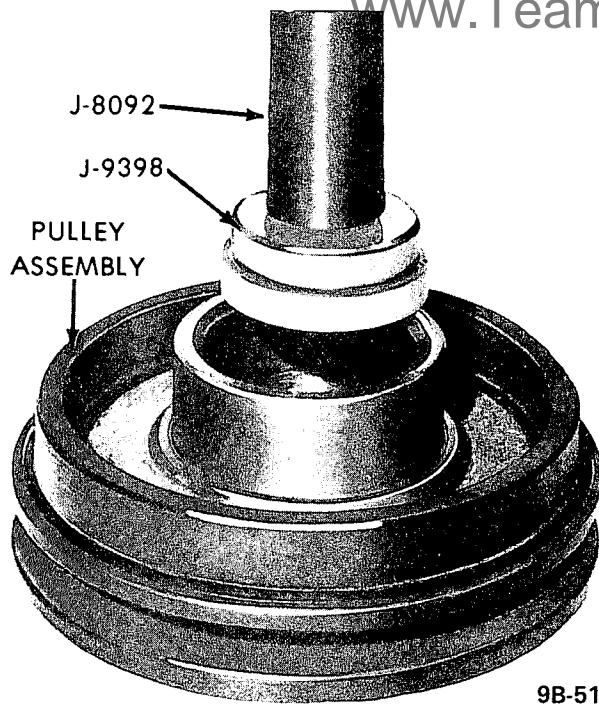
B-75 Removing Bearing from Pulley Assembly - 6 Cylinder Compressor
